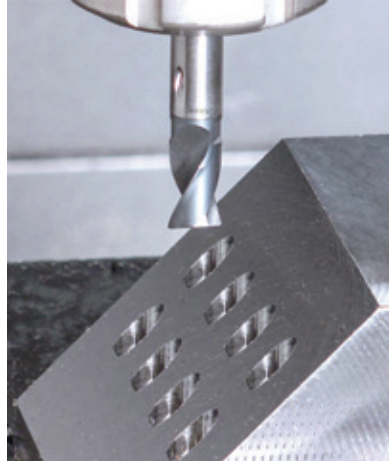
Efficient drilling inclined surfaces is not a problem for flat bottom heads.
